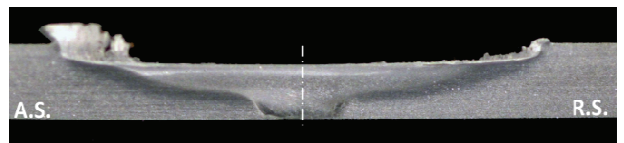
Macro image of a transverse section of a welded joint – 500 rpm.
